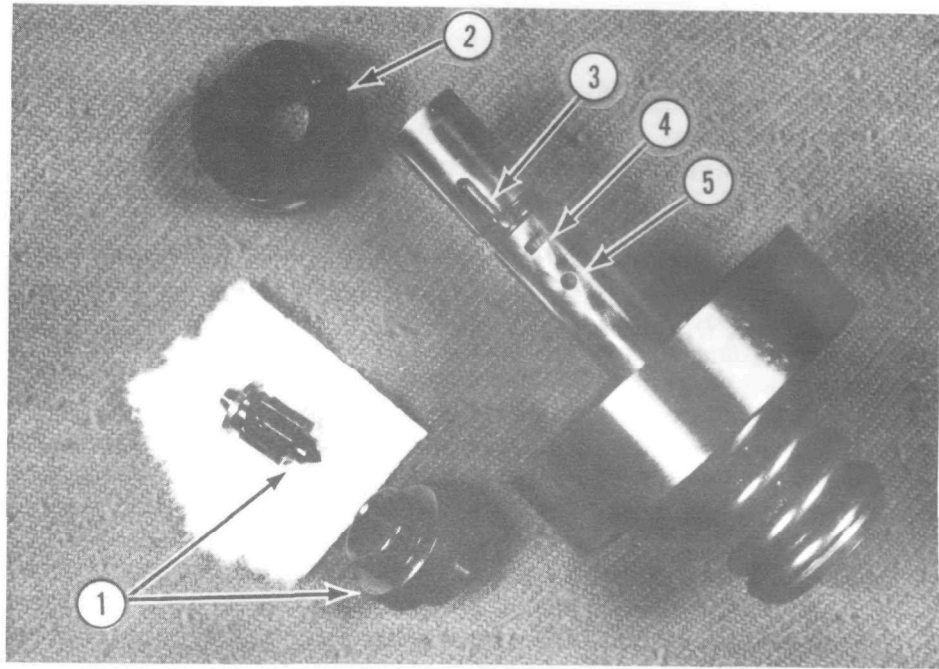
Close-up of fuel metering parts from the hydraulic head of the injection pump
